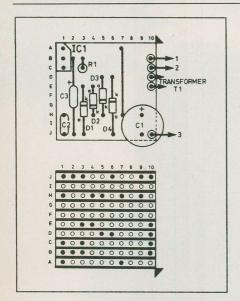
Component layout and details of wiring to the transformer secondary winding and to the DIN socket.
